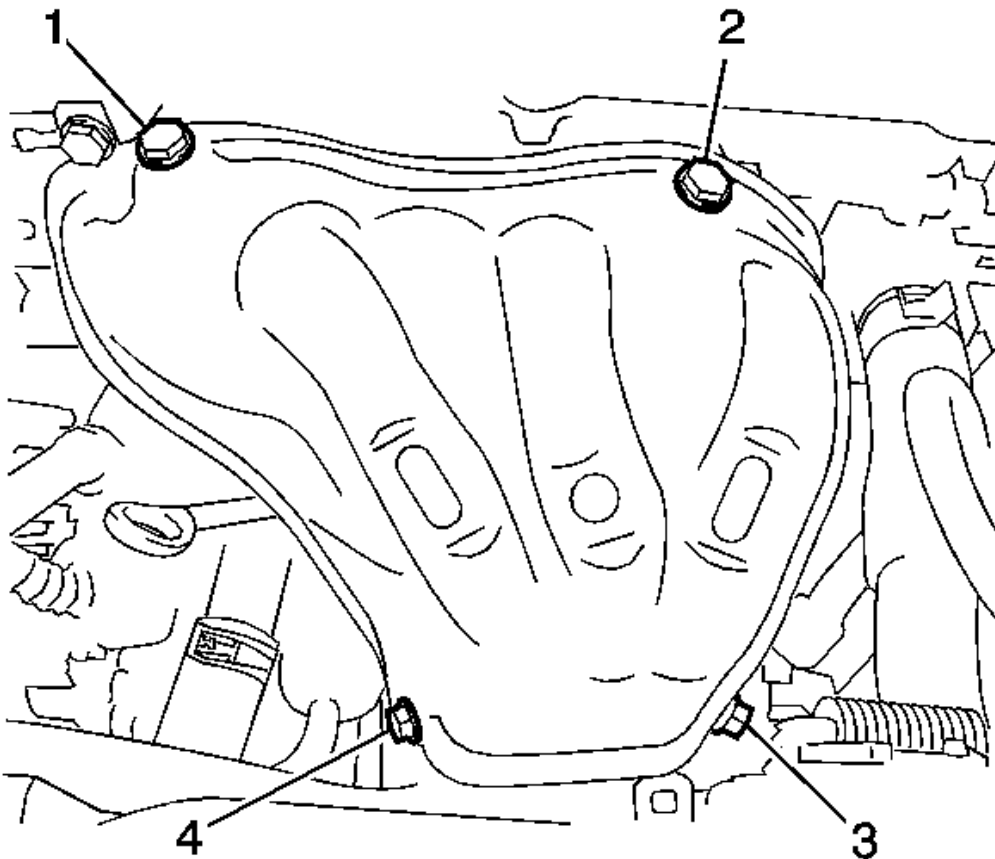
Identifying Exhaust Manifold Heat Insulator Bolts
